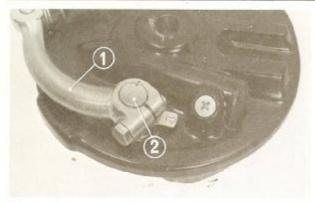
(1) Front brake arm (2) Front brake cam
